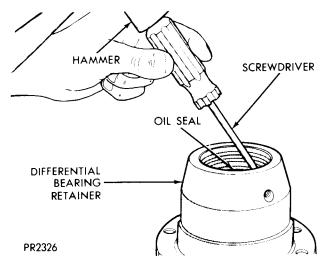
Using Suitable Tool, Remove Differential Bearing Retainer Oil Seal
